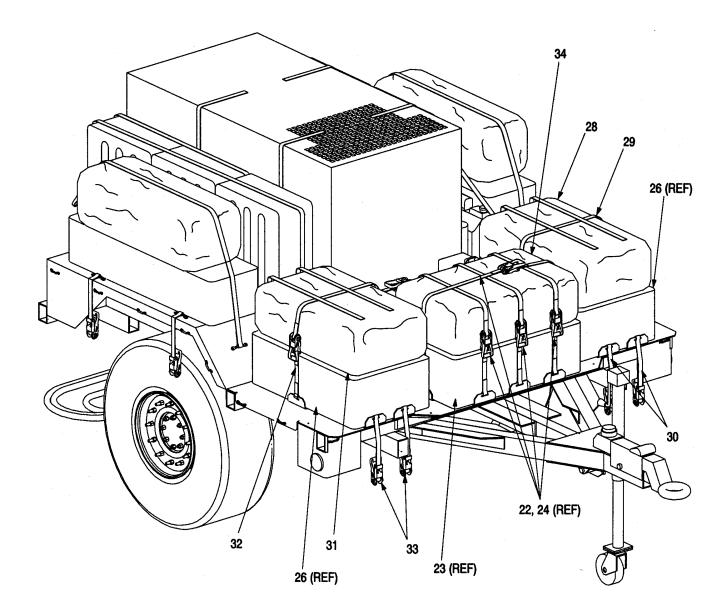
HMT Load Plan (Sheet 3 of 5)
